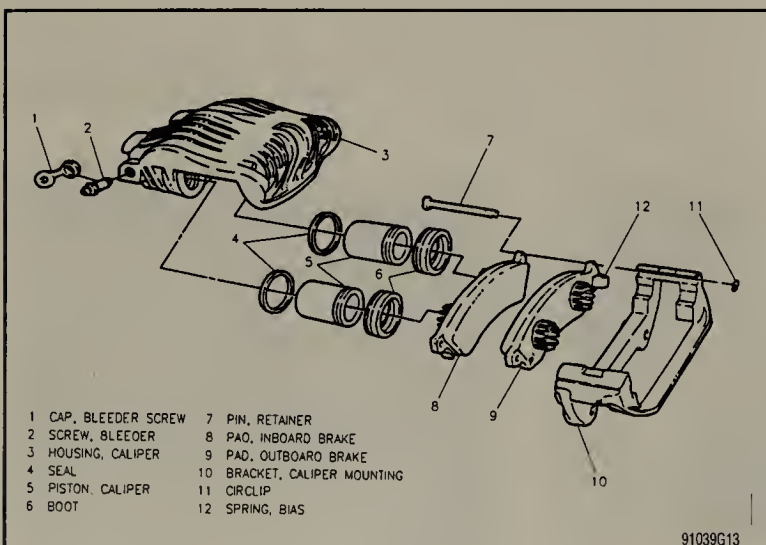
Exploded view of the inboard and outboard brake pads—1996 vehicle shown
